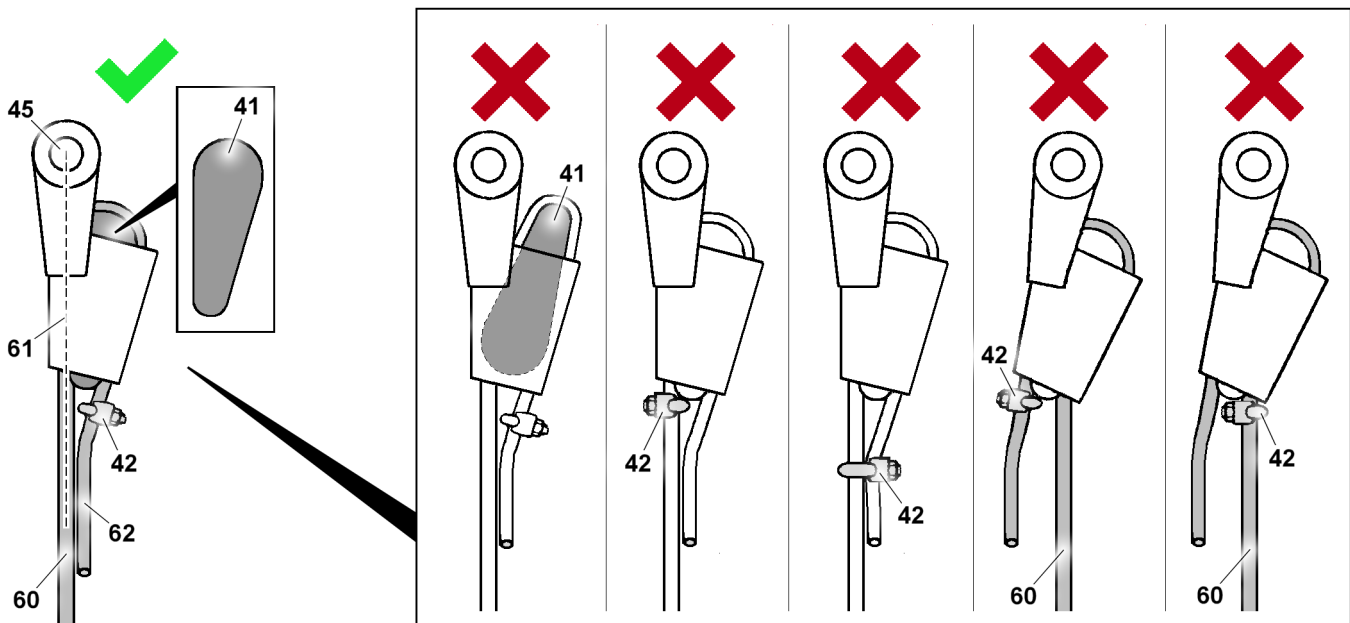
Exemplary illustration with a correctly and incorrectly assembled wedge lock without a bore for a clamp
